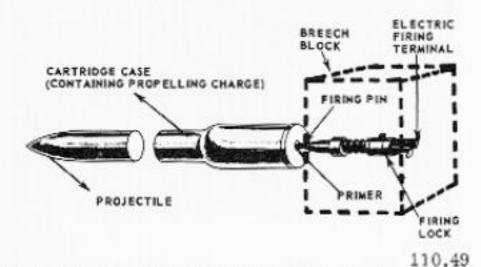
Sliding-wedge breech elementary firing mechanism.
